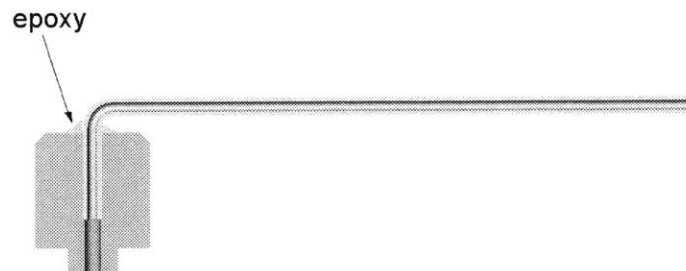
Cross-section of the small-bore fluidic fitting, showing location of epoxy
